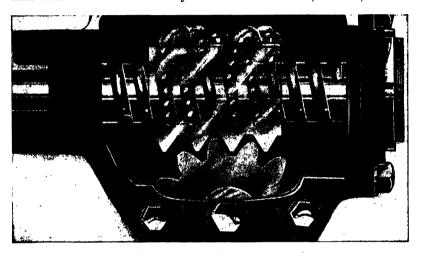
Worm-and-ball-bearing-nut steering gear
